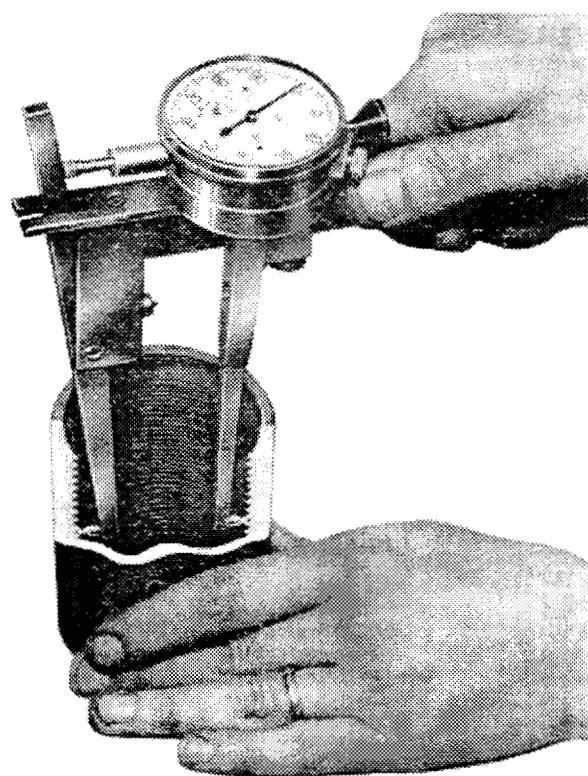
Typical Internal-Thread Taper Gauge for Threads in Sizes Smaller Than 4 $\frac{1}{2}$
